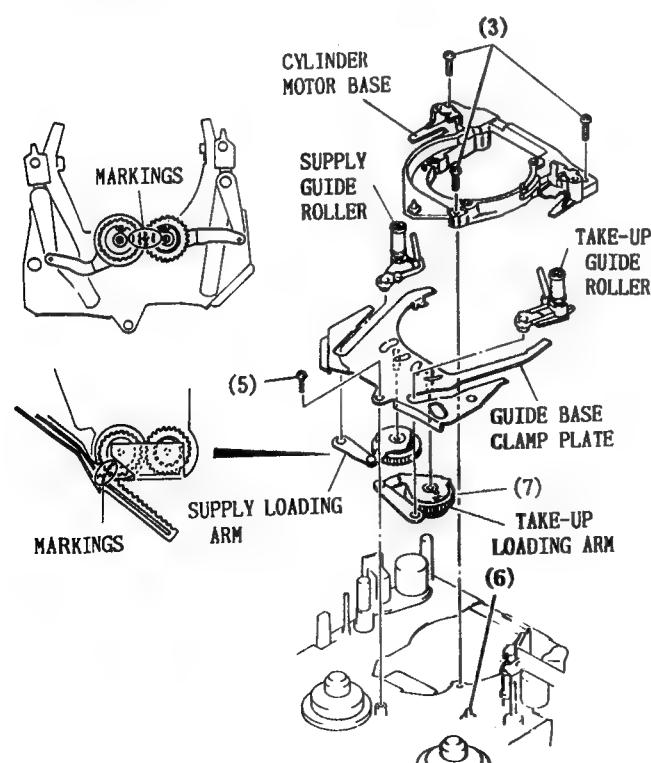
Cylinder Motor Base and Supply/Take-up Loading Arms
